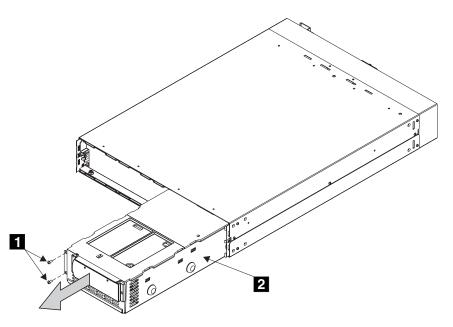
Removing the 2145 uninterruptible power supply electronics assembly
